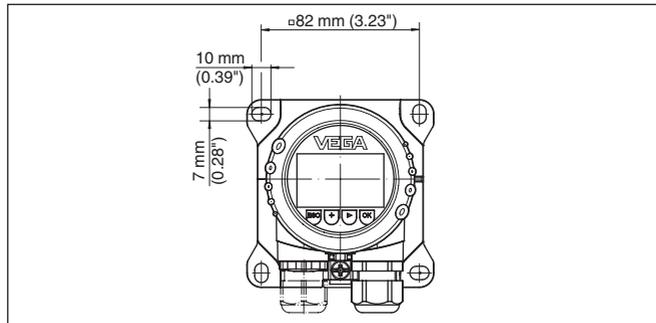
Drilling dimensions for VEGADIS 81 for wall mounting
